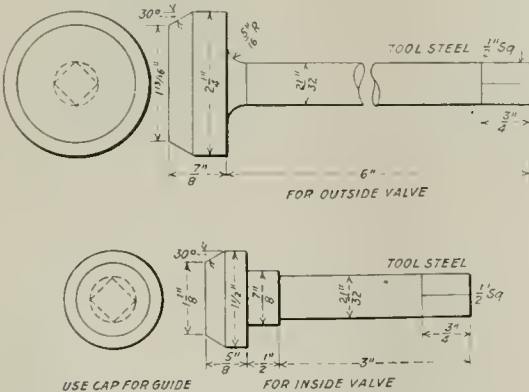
Non-Lifting Injector Throttle Valve Reseating Tool
